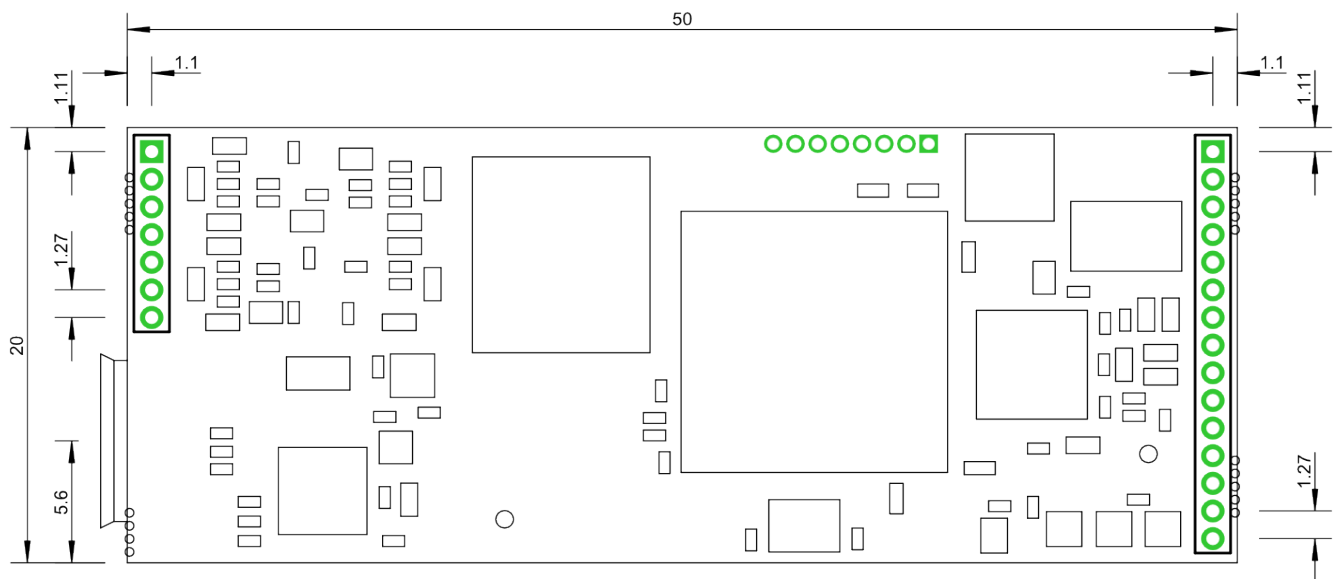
Outline Dimensions (Top View, all Dimensions are in Millimeters)
